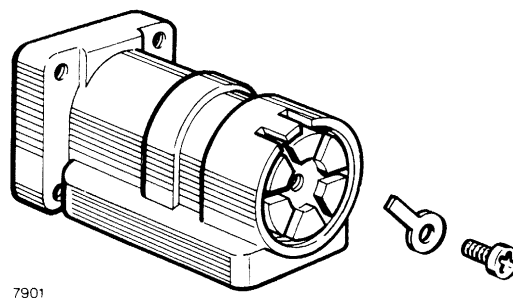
Locking plate, retaining screw and pressure adjusting plug
